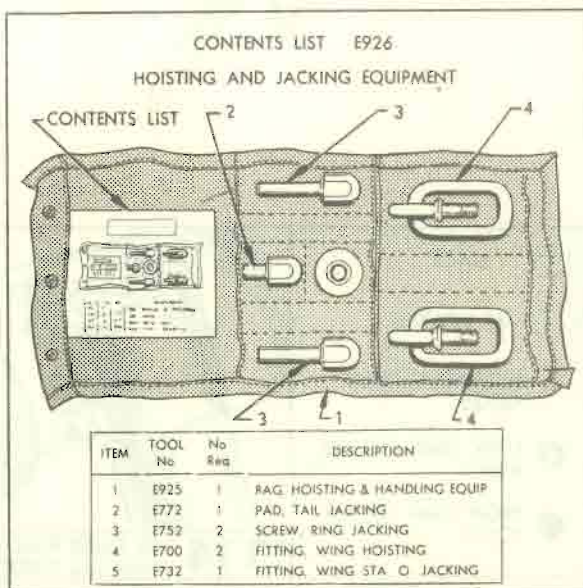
TOOL KIT FURNISHED WITH AIRPLANE
